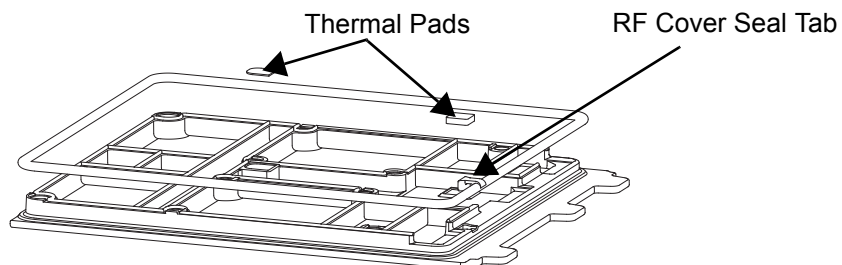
Inspecting Thermal Pad and Installing RF Cover Main Seal
